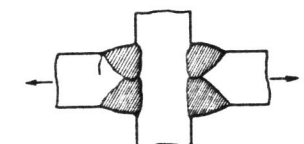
Cruciform joint with full penetration (crack initiation at the weld toe).
